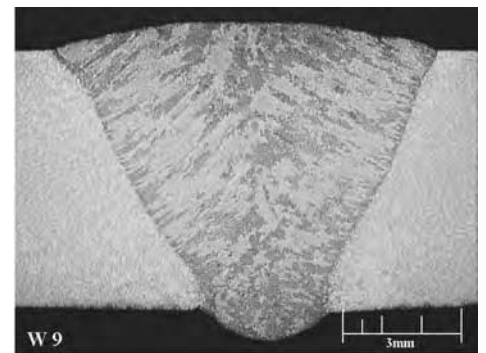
A 6 mm (0.25 in.) thick type 304 stainless steel welded with penetration-enhanced gas tungsten arc welding (DeepTIG wire at 195 A). Courtesy of the Edison Welding Institute
